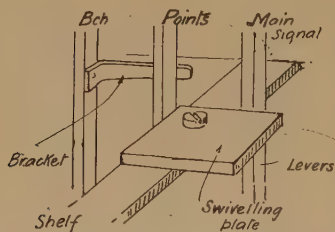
Further Details of Mr. Guy Mitchell's Locking Gear
